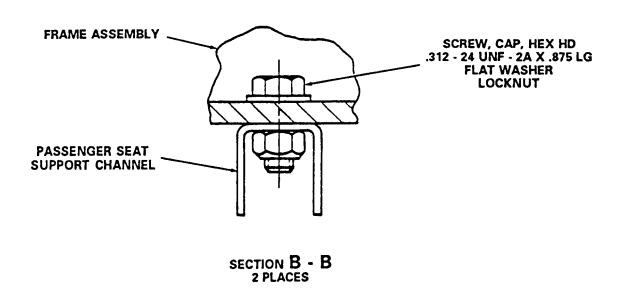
Frame Assembly Installation (Sheet 2 of 2)
